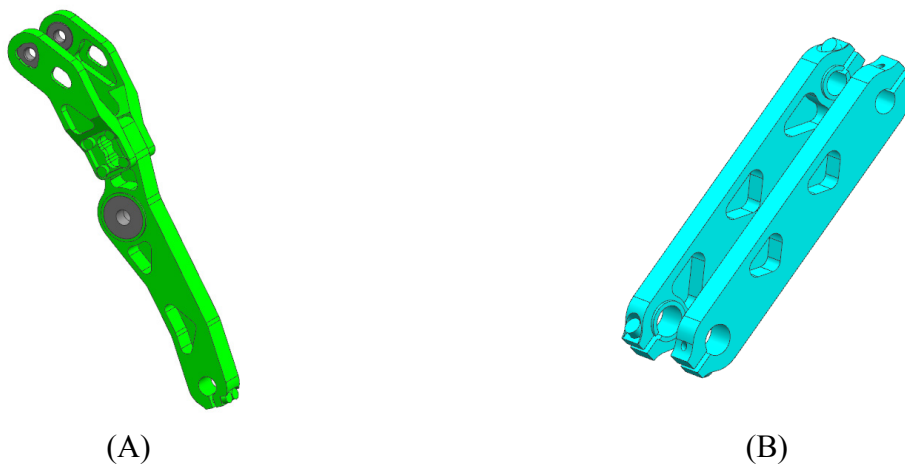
(A) Three bearing Hoeken's linkage piece and (B) two bearing linkage pieces for the knee
